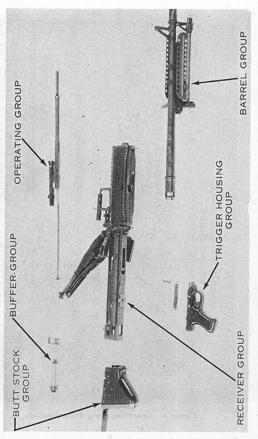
Machinegun, 7.62mm M60, disassembled into six major groups.
